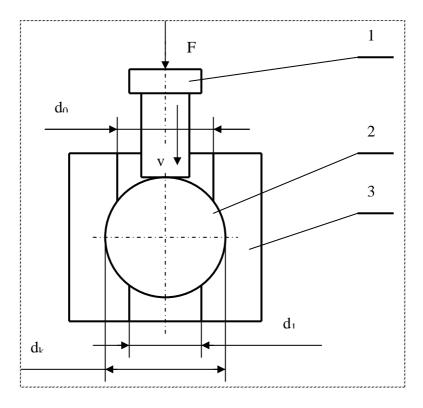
Schematic arrangement of the experimental setup: 1 – push rod, 2 – ball, 3 – work-piece
